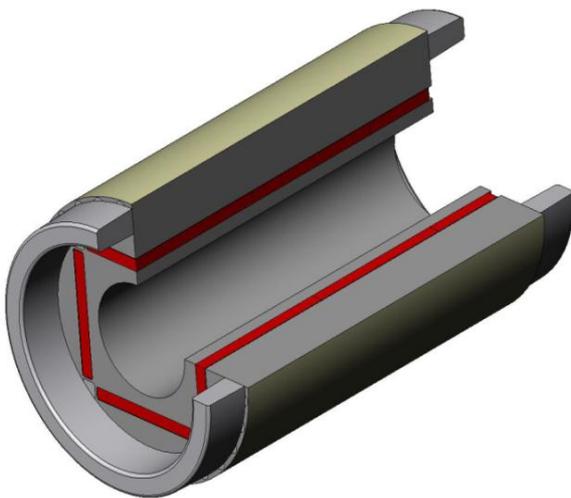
Rotor design of a LSPM-Motor for industrial applications
